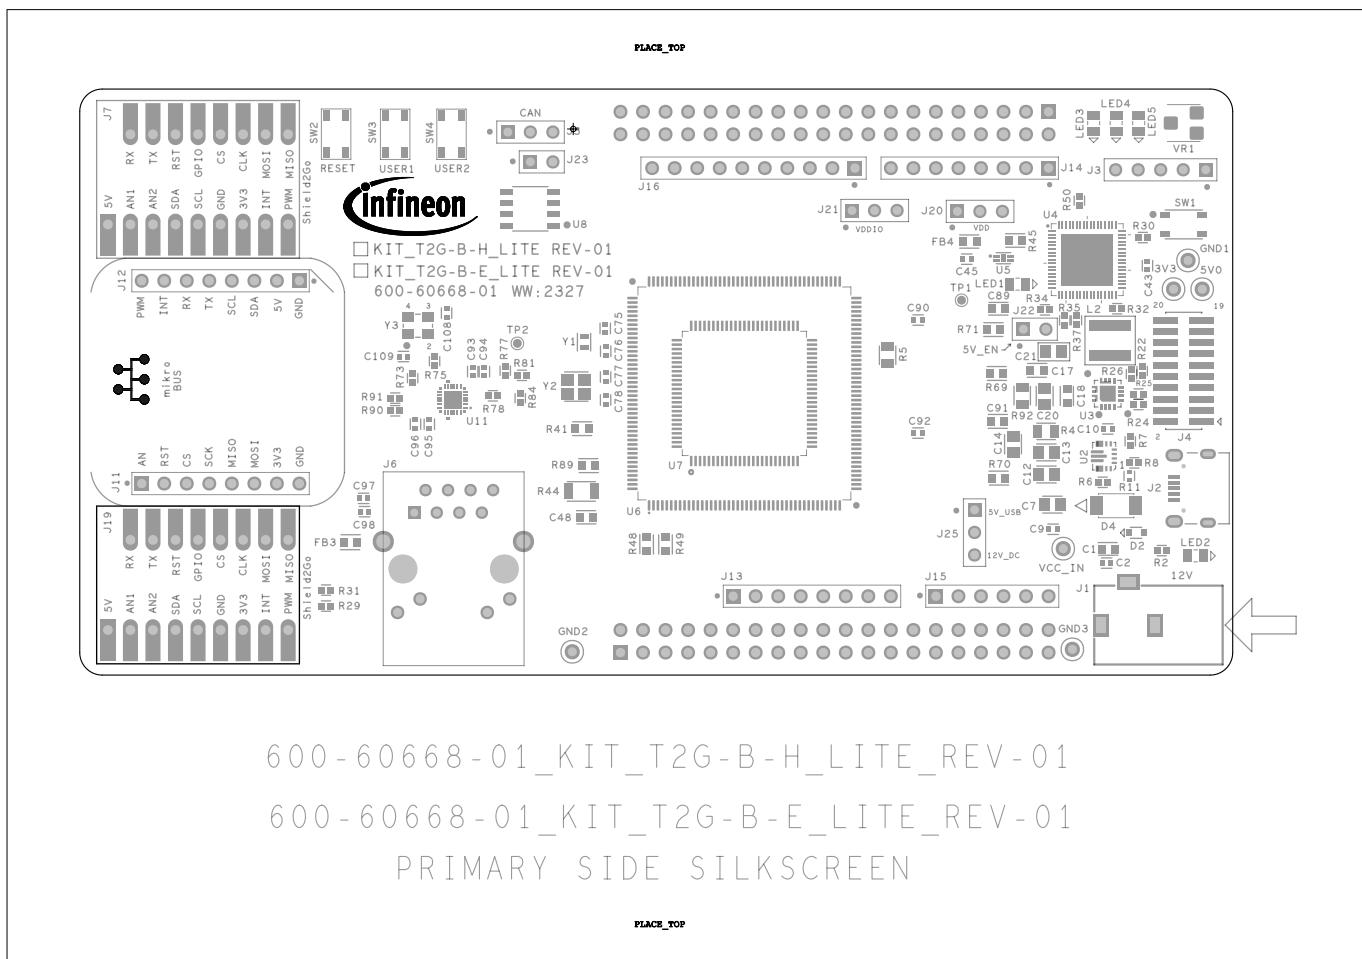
Primary side assembly of TRAVEO™ T2G B-E Lite kit rev-01
